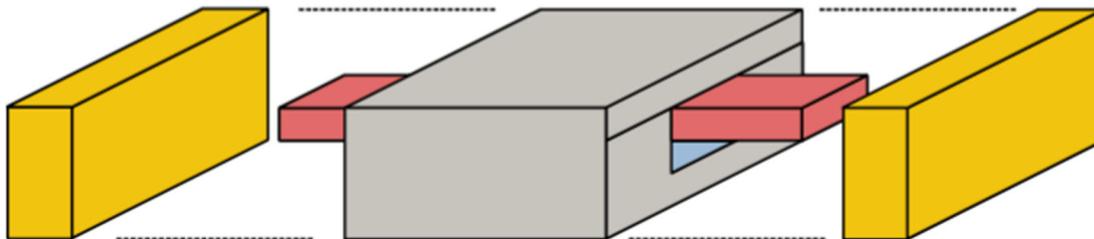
Composite Ferrite Bead Inductor – Assembled View
